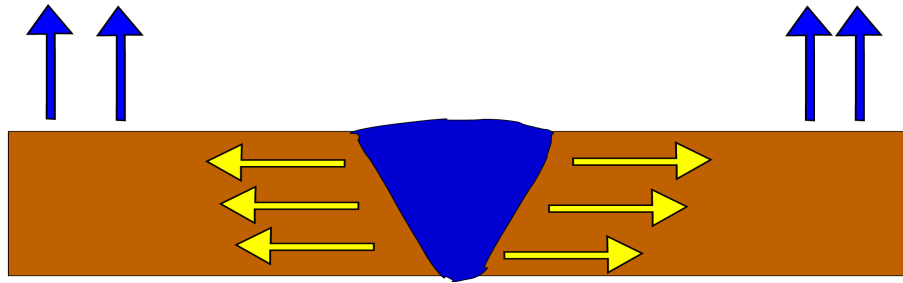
A butt weld. During the cooling process the material will bend in the direction of the blue arrows. The design of the bevel causes more molten metal in the top of the bevel than in the bottom of the bevel, resulting in stronger contracting forces at the top.
